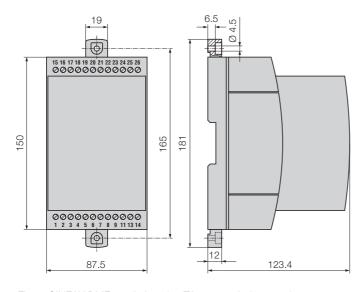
SINEAX DME 406 in housing T24, screw hole mounting brackets pulled out.
